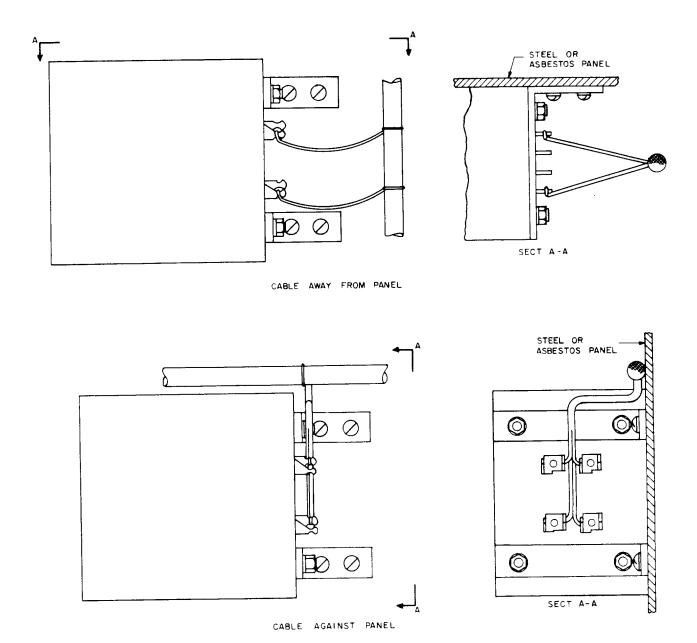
Transformers — No. 344F and Similar Types — No. 14 Gauge and Smaller Wires
